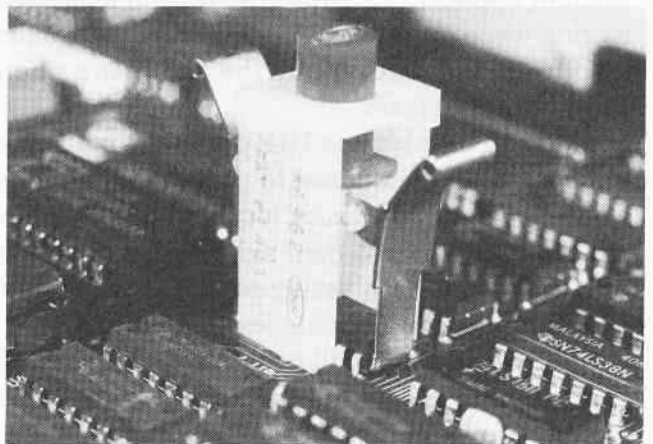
A spring-loaded dual in-line extractor tool.
